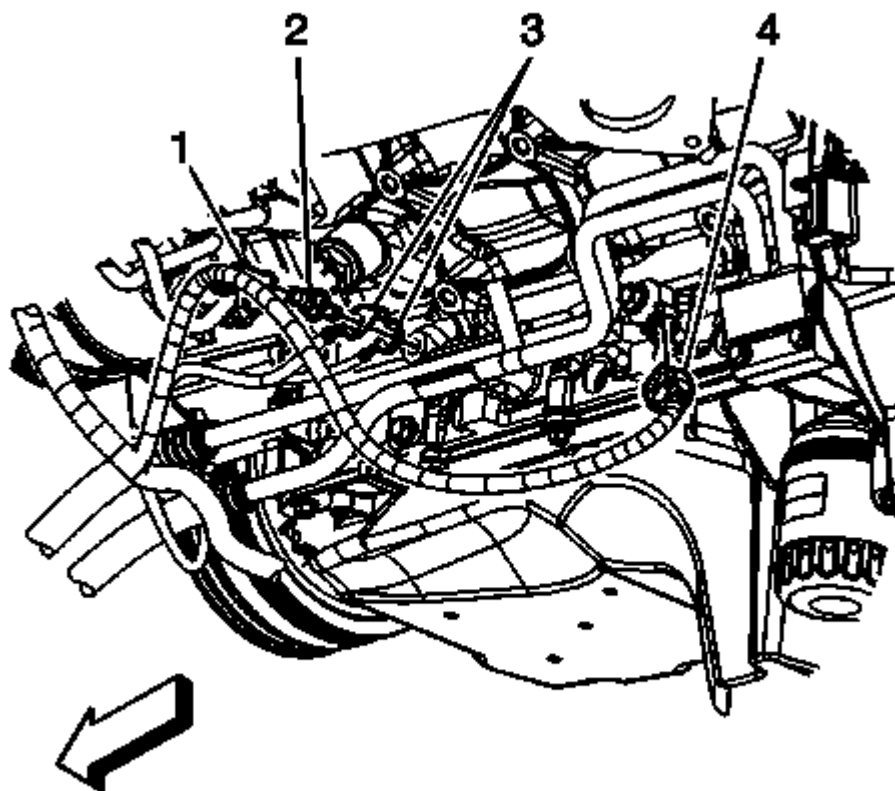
View Of Electrical Connector, Cable Channel Bolt & Pin
